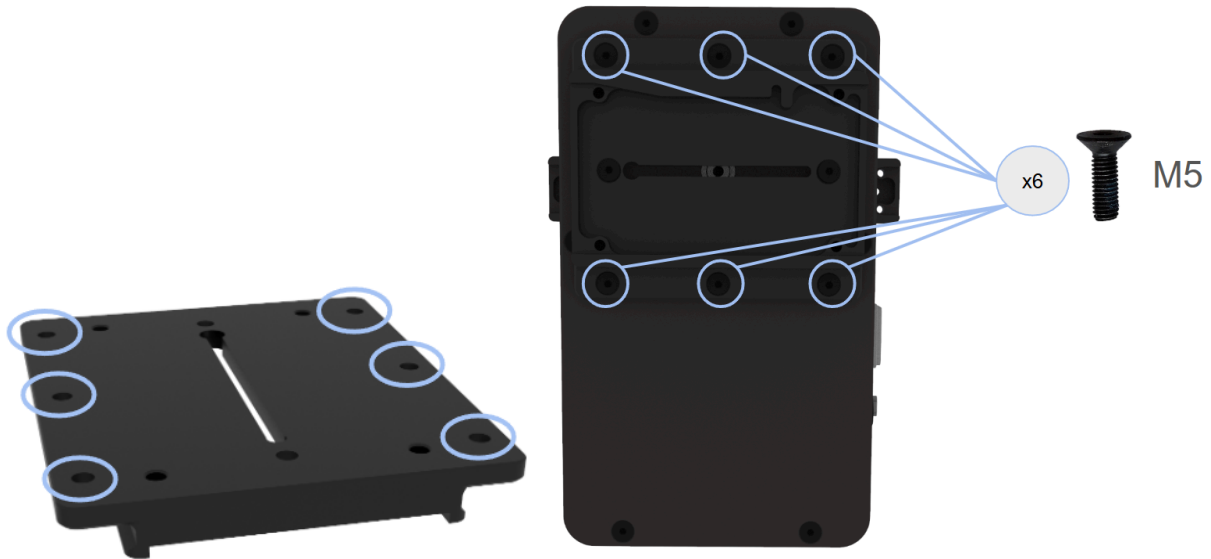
Mounting Pauli PT Head on the Raise lift rail
